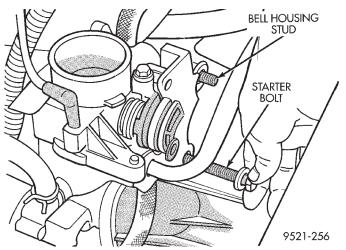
Upper Starter Bolt and Bellhousing Stud Nut
